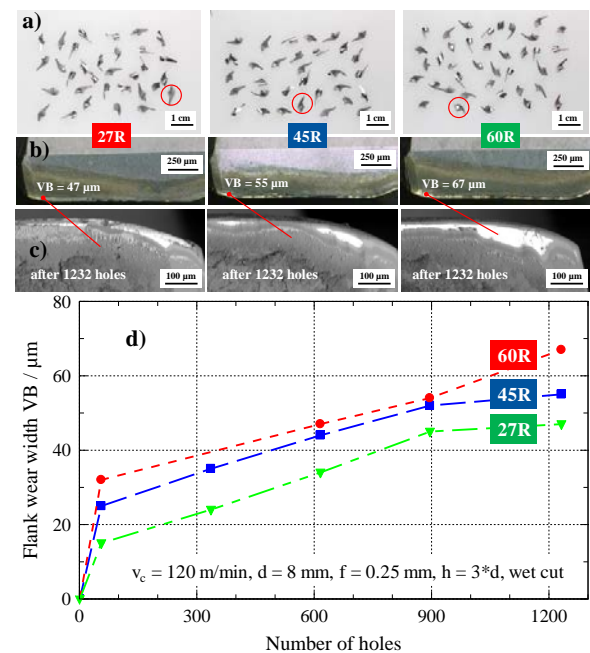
(a) Chip form; (b), (c), (d) Tool wear when drilling 27R, 45R and 60R.
